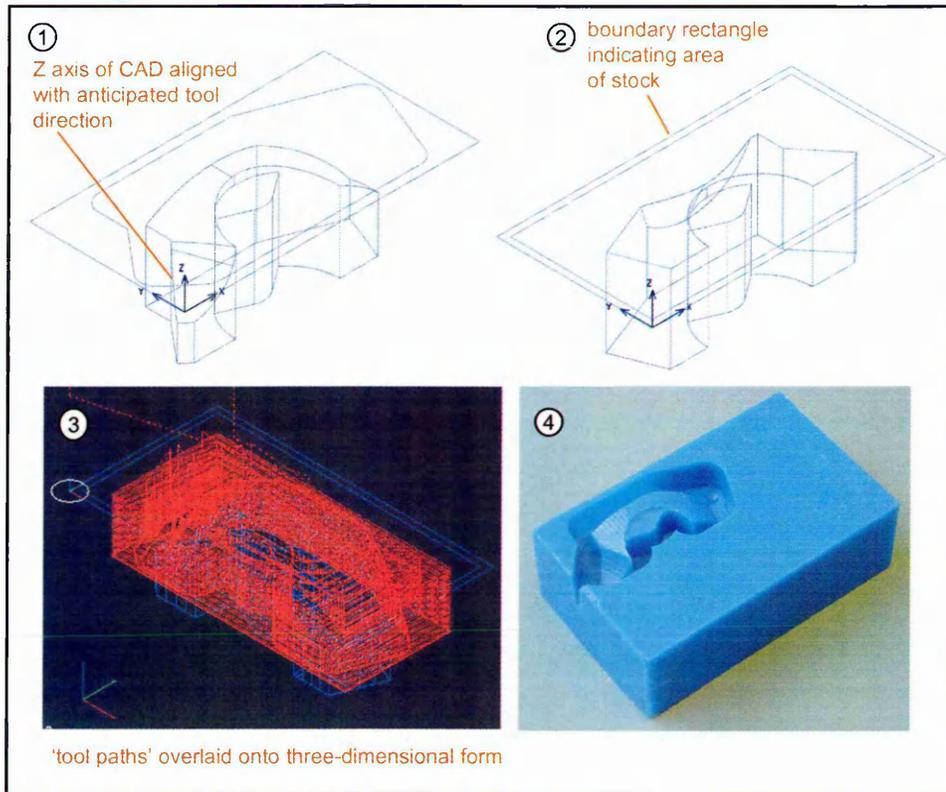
Three Dimension Machining of Distal Carpal Form
